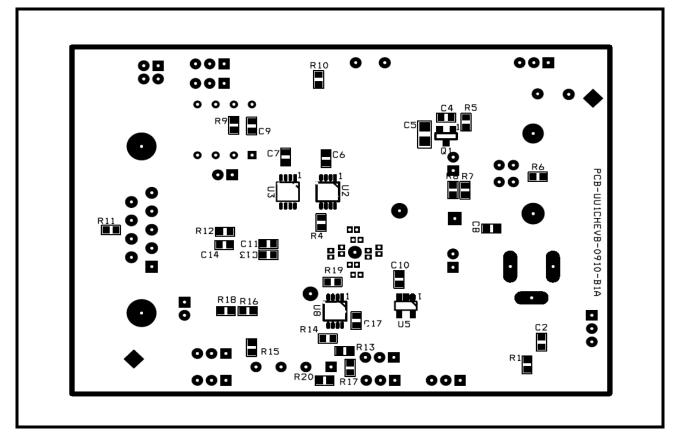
shows a bottom view of XR21V1410 evaluation board layout.
